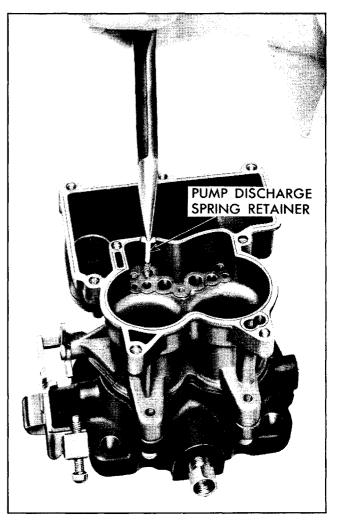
B-100 Removing or Replacing Pump Discharge Spring Retainer
